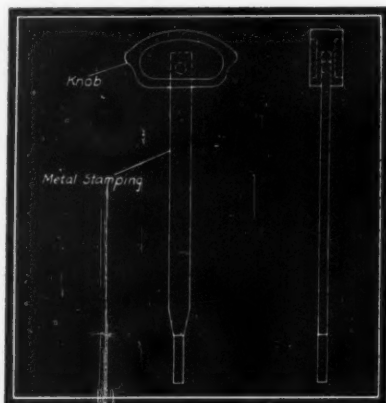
Sketch of an injection-molded knob over a stamping, a circular hole in the end of the stamping providing undercut to hold the piece firmly
